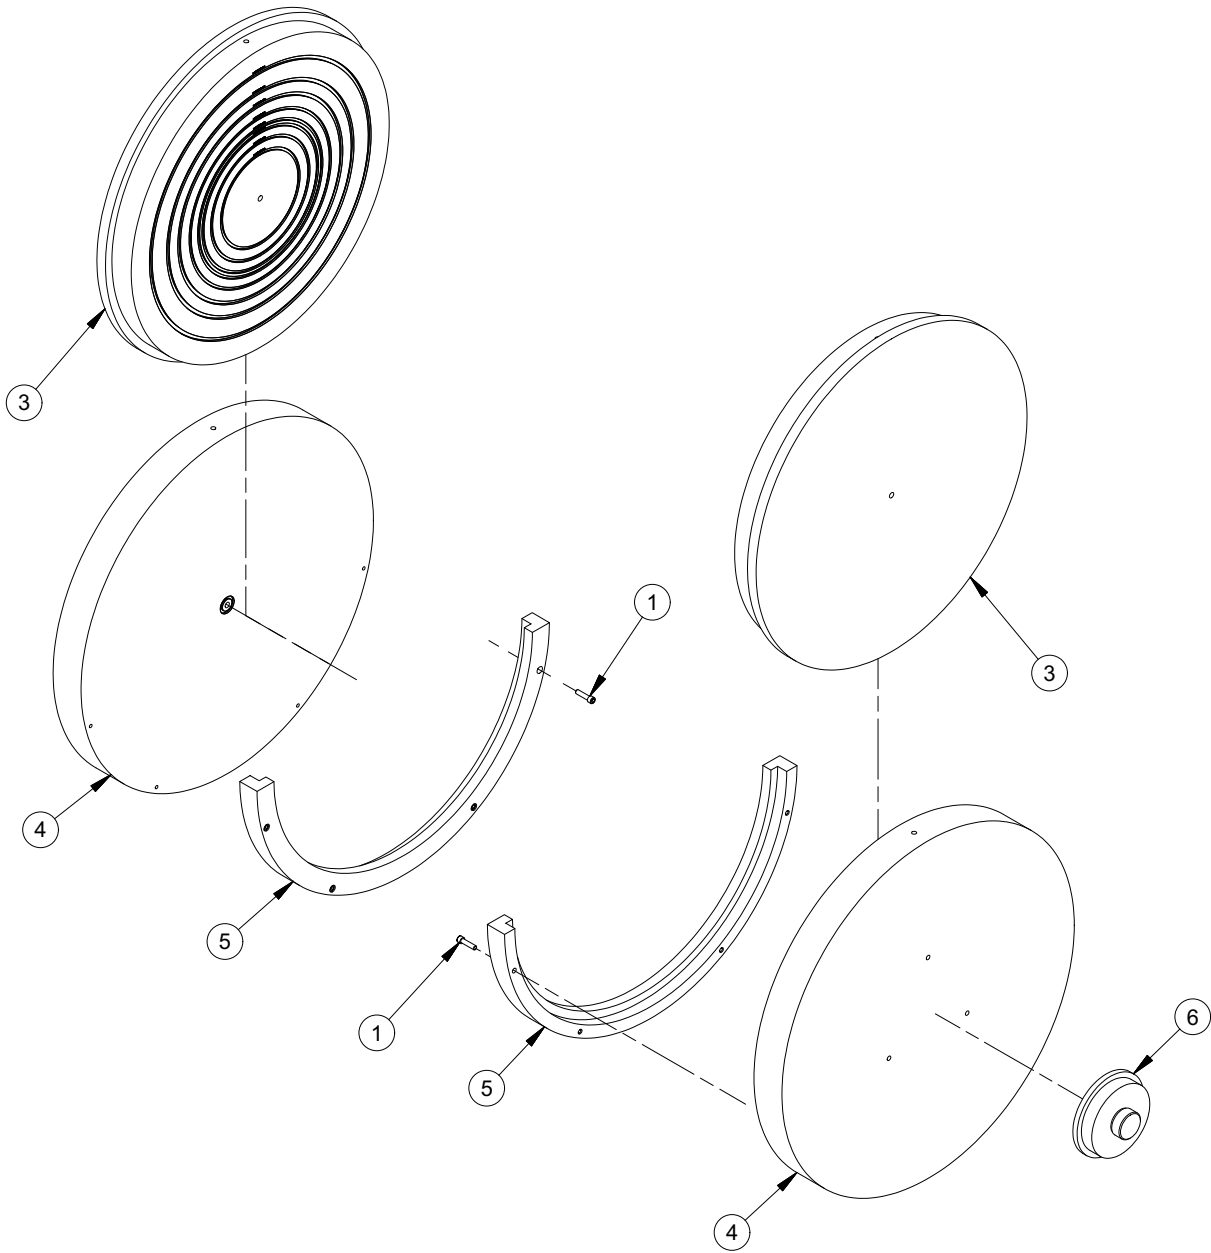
TILT MODEL KIT ASSEMBLY (P/N 90056)
